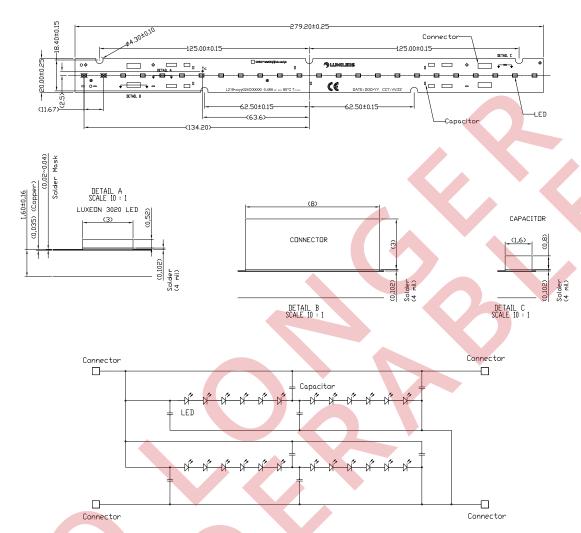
Mechanical dimensions for L218-xxxx024C30000.
